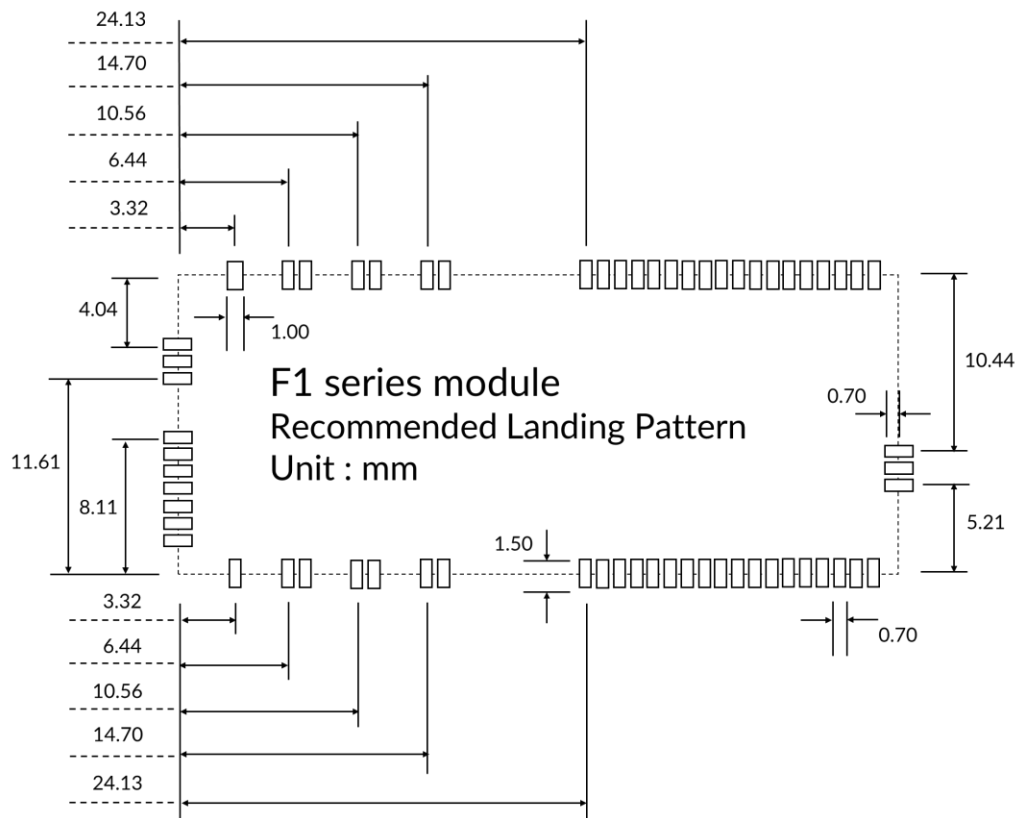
F1 Smart Module Recommended PCB Landing Pattern (Top View)
